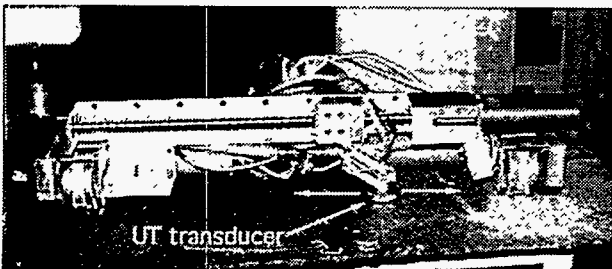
The Ultrasonic Crawler. The UT transducer is moved back and forth with a ball screw drive.
